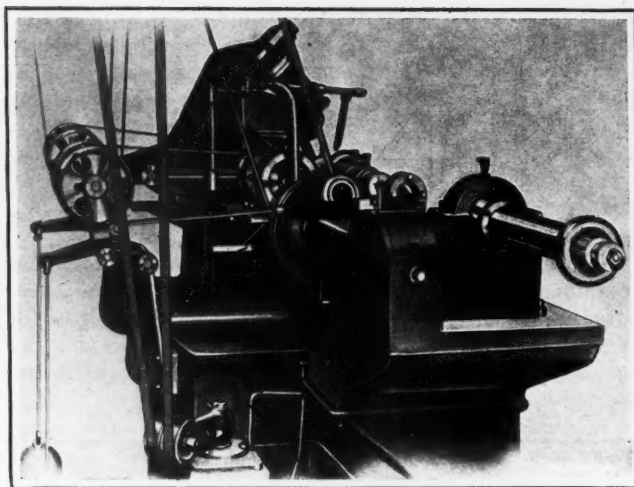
End View of Harris Thread Grinder showing Arrangement of Drive
